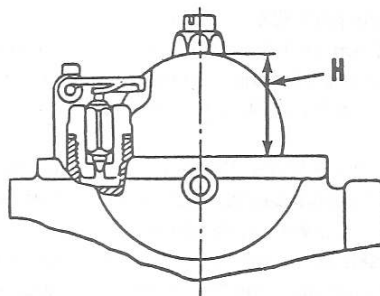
Float height (H) should be 21-22 mm (0.827-0.866 in.).
